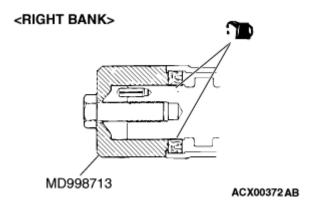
Pressing-Fit Camshaft Oil Seal Using Special Tools MD998713 And MB991559 (Right Bank)
